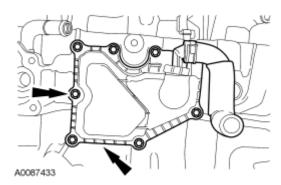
Locating Crankcase Vent Oil Separator And Bolts Courtesy of FORD MOTOR CO.
